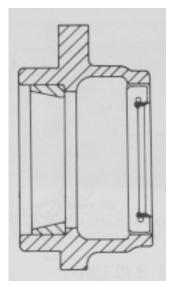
Coat outer diameter of mainshaft rear oil seal with Loctite 510. Press seal into bearing cap with lip of seal down (in). Install mainshaft rear taper bearing cup in bearing cap.
